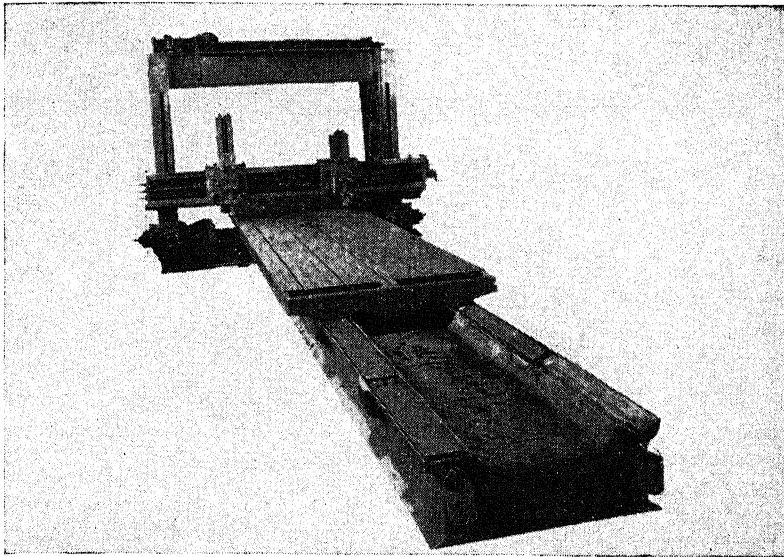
Cast iron planer which was redesigned for arc welding.
